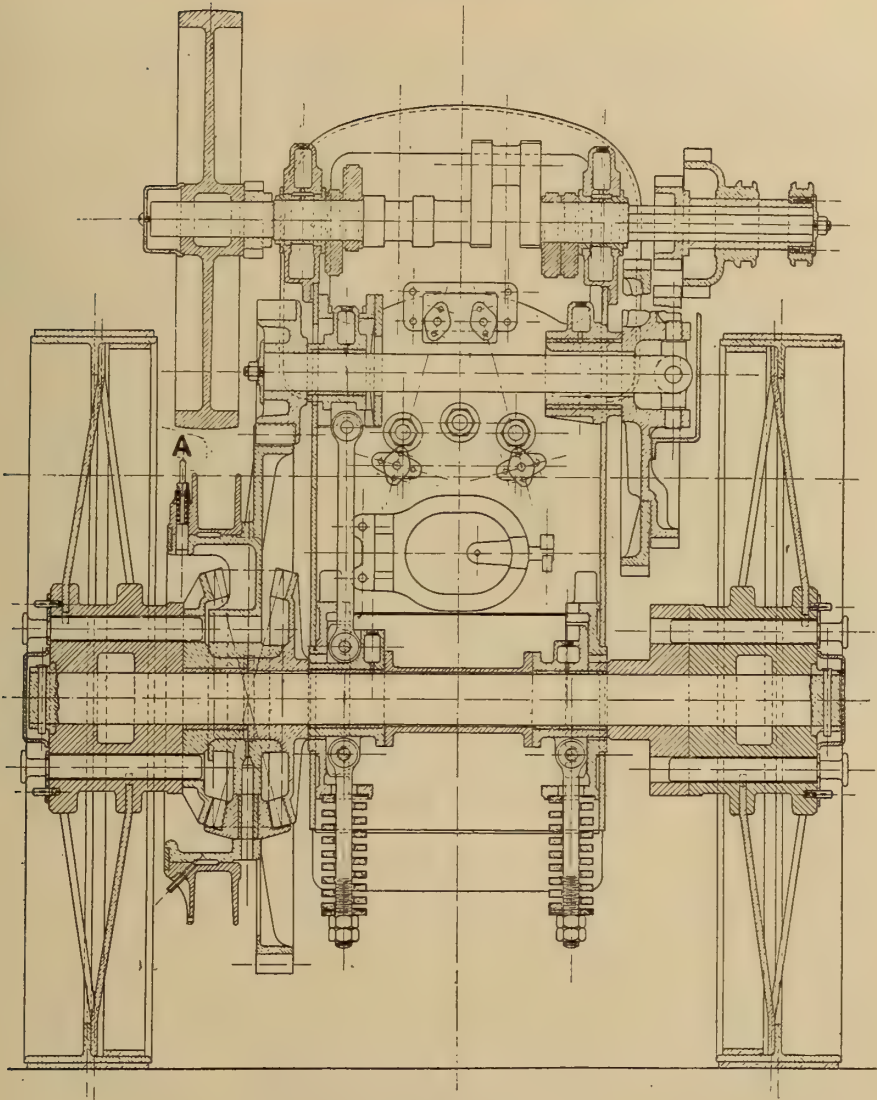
CLAYTON & SHUTTLEWORTH STEAM TRACTOR. CROSS SECTION THROUGH GEARING
